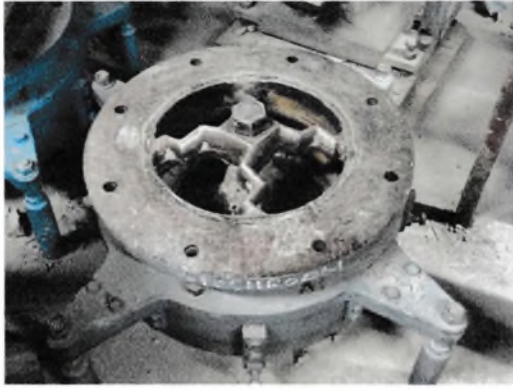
(left) A die assembly with the retaining 'spider' which holds the inner core in place.
